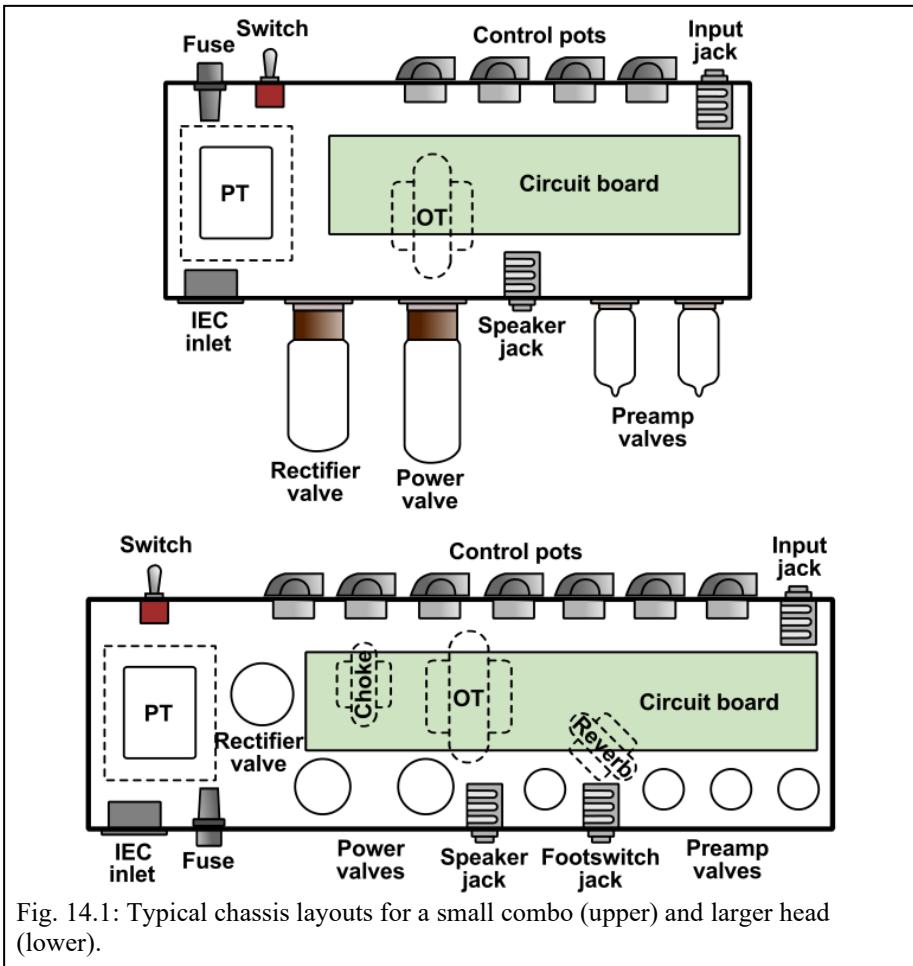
Typical chassis layouts for a small combo (upper) and larger head (lower).
